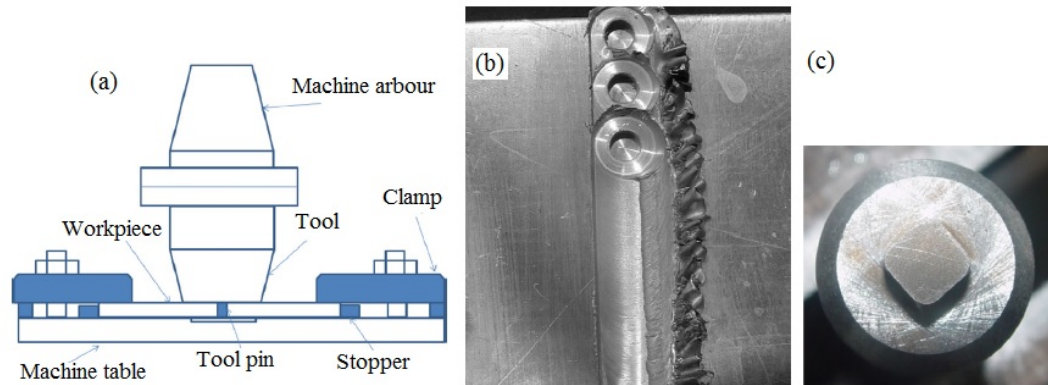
(a) Experimental Set-Up of FSP on a Milling Machine; (b) FSP'ed Sample Using 3 Overlapping Passes (c) FSP Tool Photograph Showing the Tool Shoulder and the Square Pin (El-Rayesa & El-Danafa, 2012).
